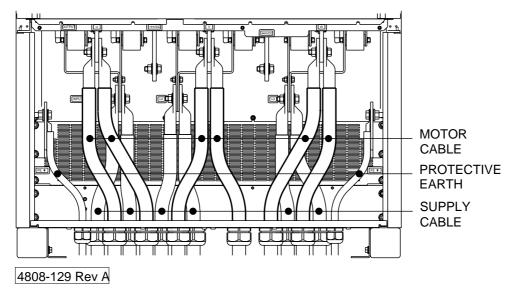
Microdrive Elite Frame 6 Screened Motor Cable Configuration
